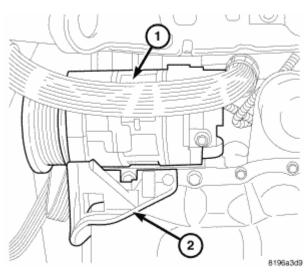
A/C COMPRESSOR Courtesy of CHRYSLER LLC
